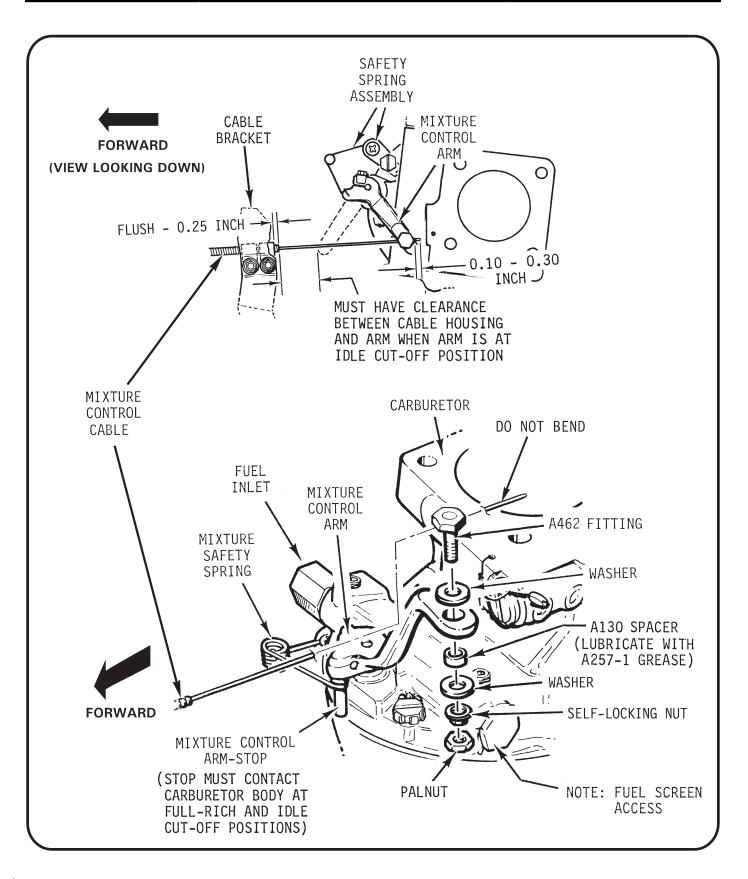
O-540 MIXTURE CONTROL INSTALLATION
